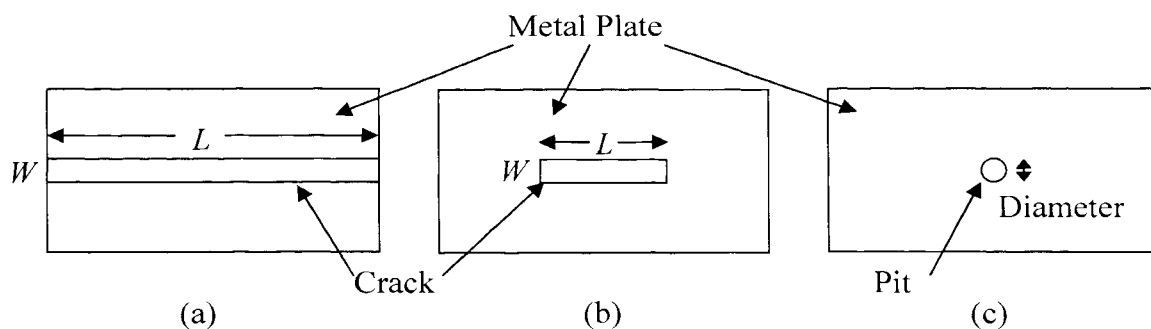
Plan view of three types of damage: a) long crack, b) finite crack, and c) pit (not-to-scale).
